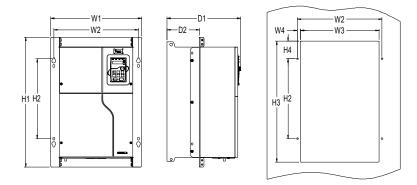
380V 110–200kW VFD flange mounting diagram Table C-5 380V 11–200kW VFD flange mounting dimensions
